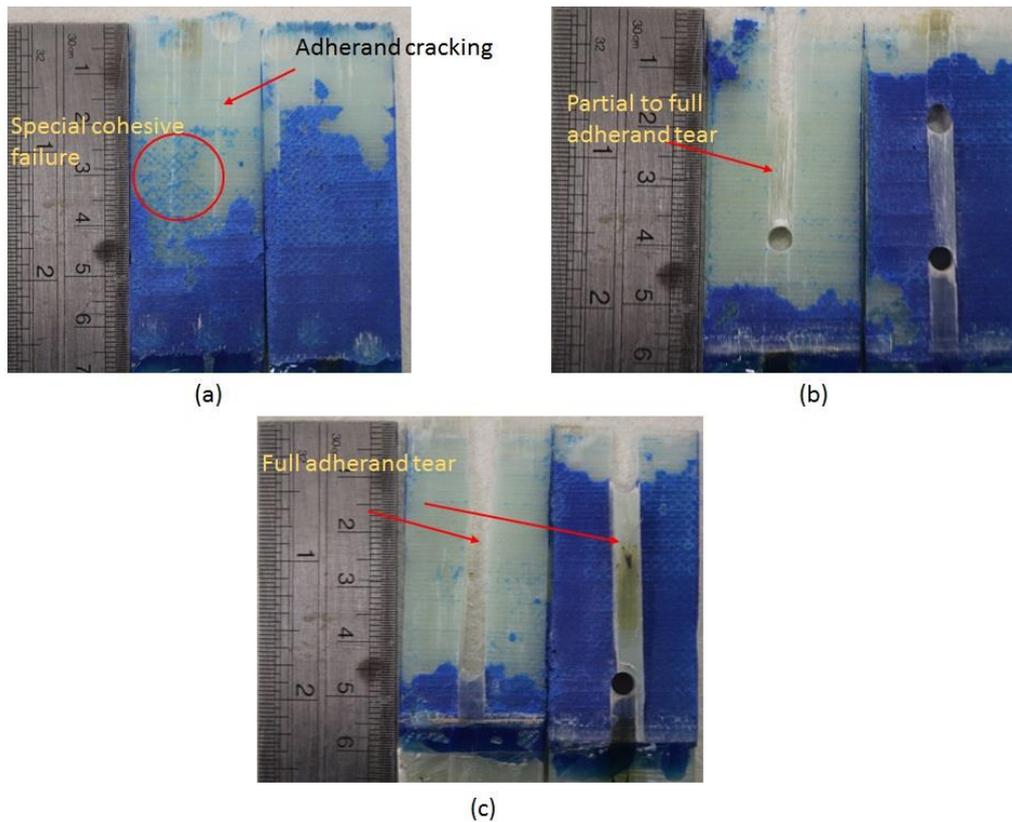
Fractured bond-line surface of (a) adhesively bonded scarf joint, (b) hybrid scarf joint with fasteners placed 24 mm apart (Hybrid A), and (c) hybrid scarf joint with fasteners placed 44 mm (Hybrid B) apart
